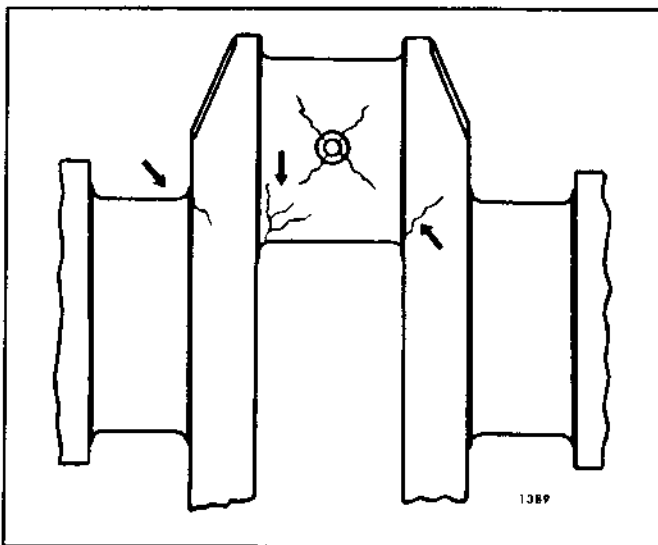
Crankshaft Fatigue Cracks
